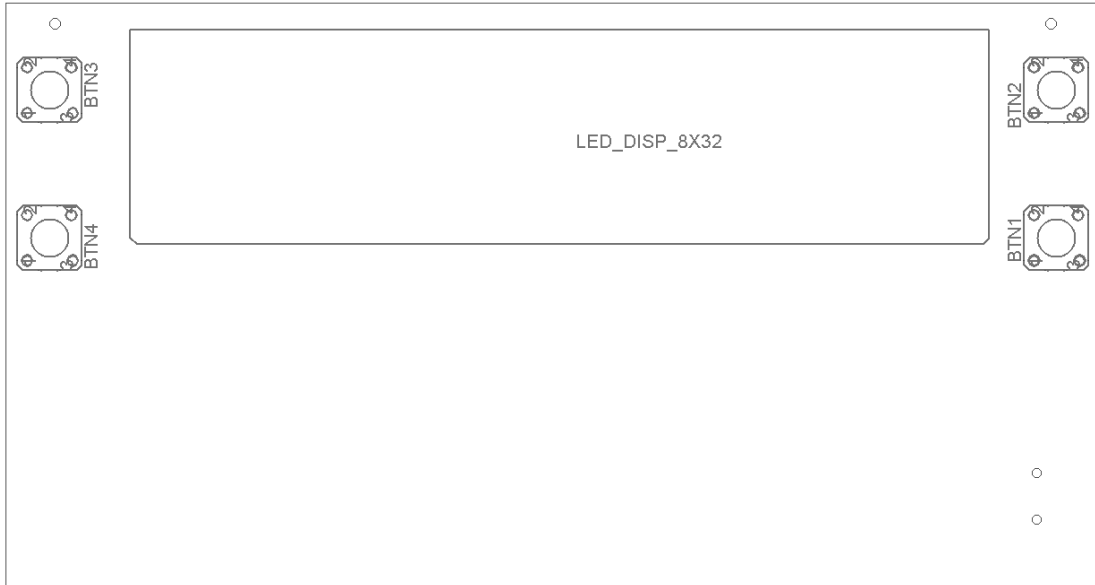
Top component assembly (dimensions are 103.5 × 55.2 mm)
